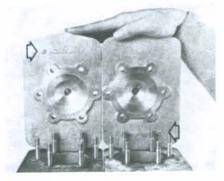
Cylinder heads are identical but reversed on twin cylinder free engines.
